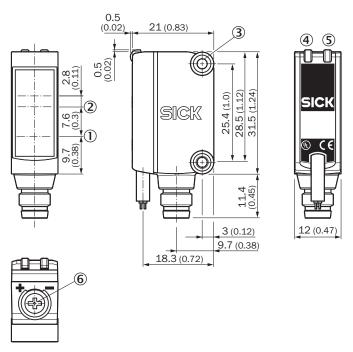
Dimensional drawing - FlexChain GTBE6-C
